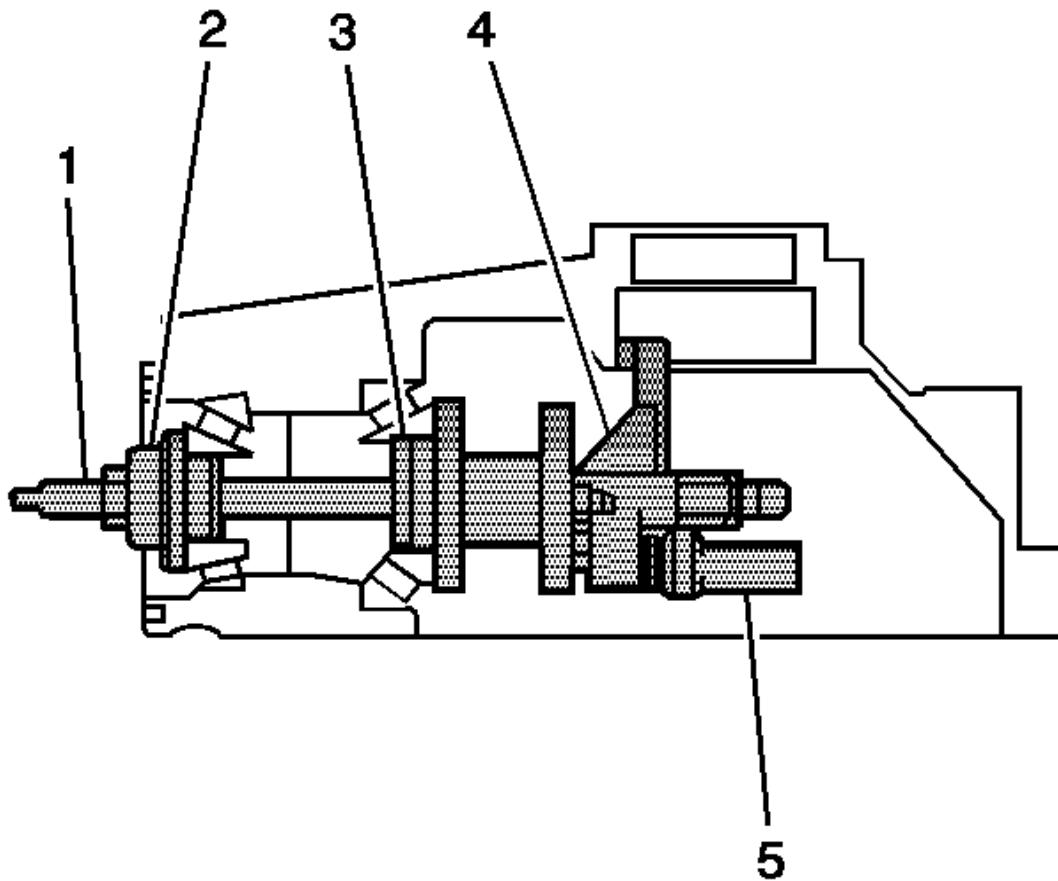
Using J 36601-7, J 36601-5, J 21777-8 & J 36601-3 To Adjust Pinion Depth
